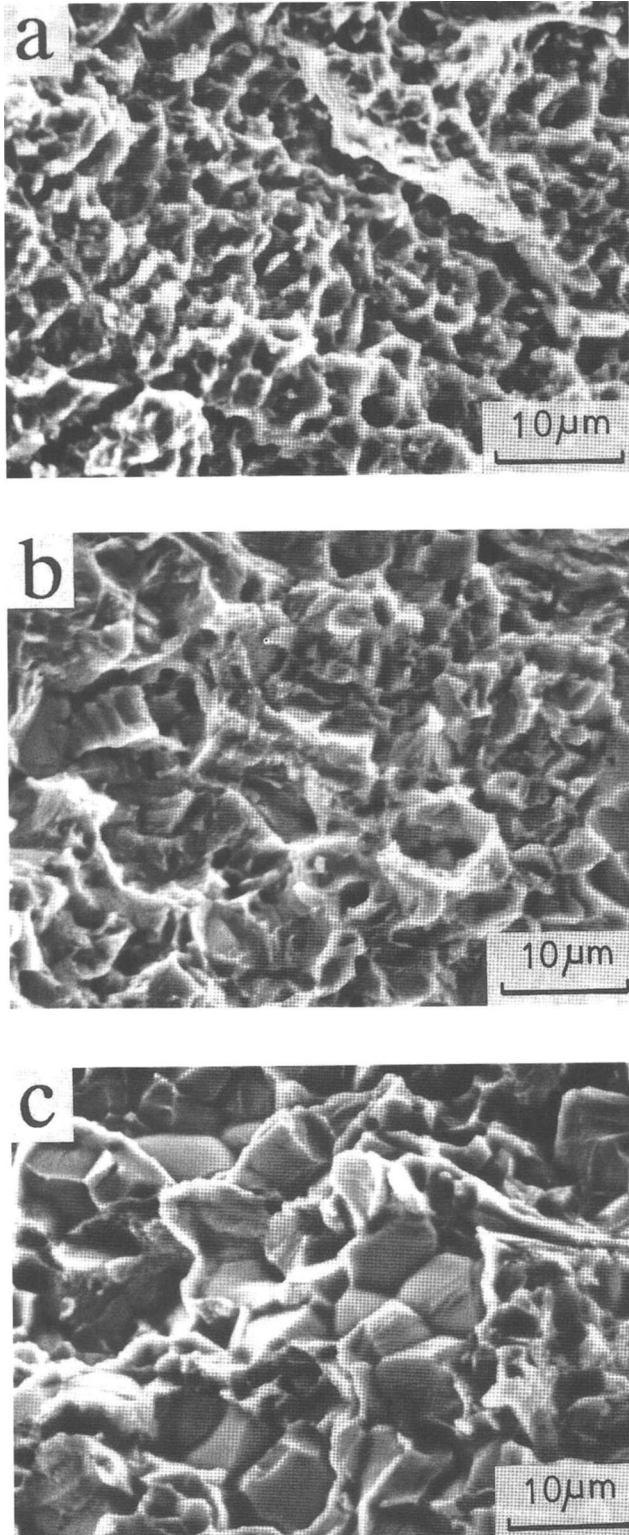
SEM fractographs showing (a) the fusion zone, (b) the heat-affected base metal, and (c) the HAZ of the B3-8 weld.
